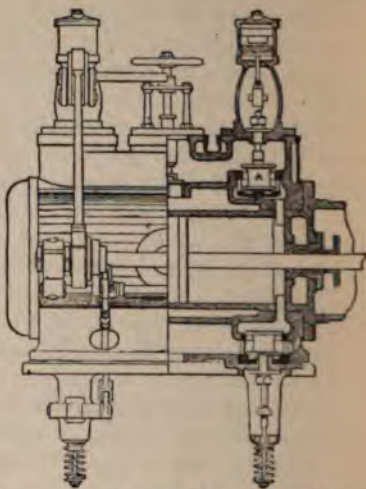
Longitudinal of Cylinder, with Drop Valves and Trip Gear for Steam Entry and Exhaust.
